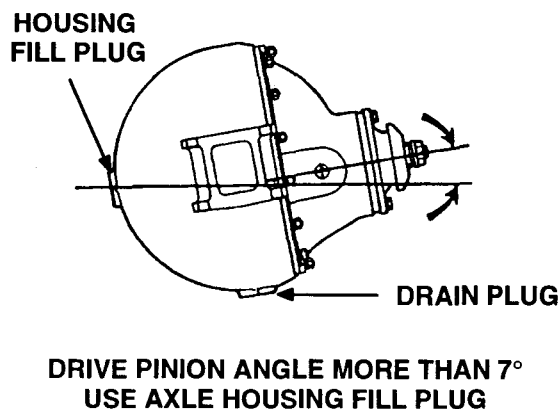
FRONT MOUNTED DOUBLE REDUCTION AND TWO-SPEED AXLES
